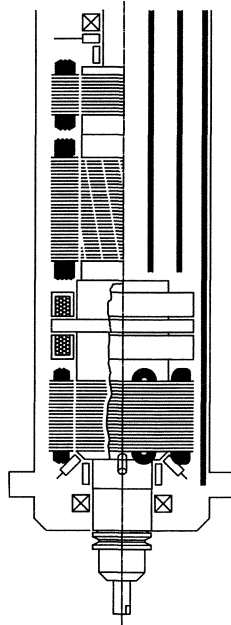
Ultra-fast high-frequency spindles with "active" magnetic bearings. $80\,000\text{ min}^{-1}$, 10 kW, SKI 25; $60\,000\text{ min}^{-1}$, 20 kW, SKI 30; $40\,000\text{ min}^{-1}$, 40 kW, SKI 40. [Courtesy of Rudolfe Carne Ltd/TBAG.]
